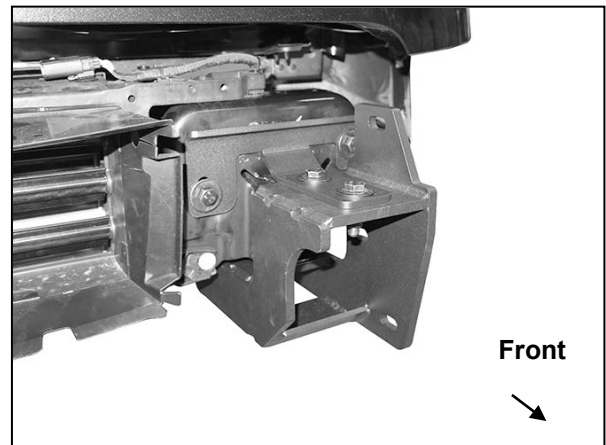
Attach driver/left Support Bracket to top mounting holes in end of frame
